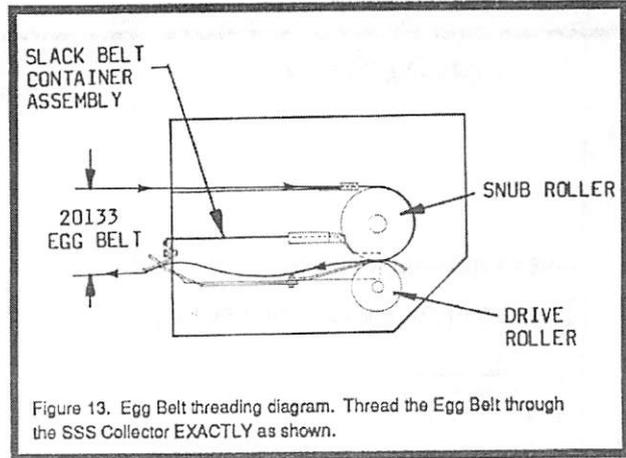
Egg Belt threading diagram. Thread the Egg Belt through the SSS Collector EXACTLY as shown.
